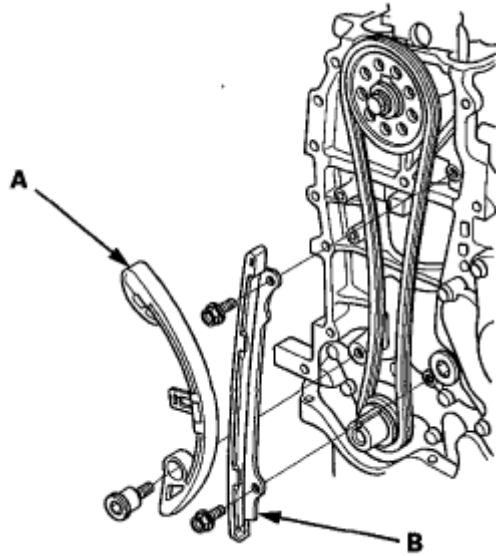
Locating Cam Chain Tensioner And Cam Chain Guide
